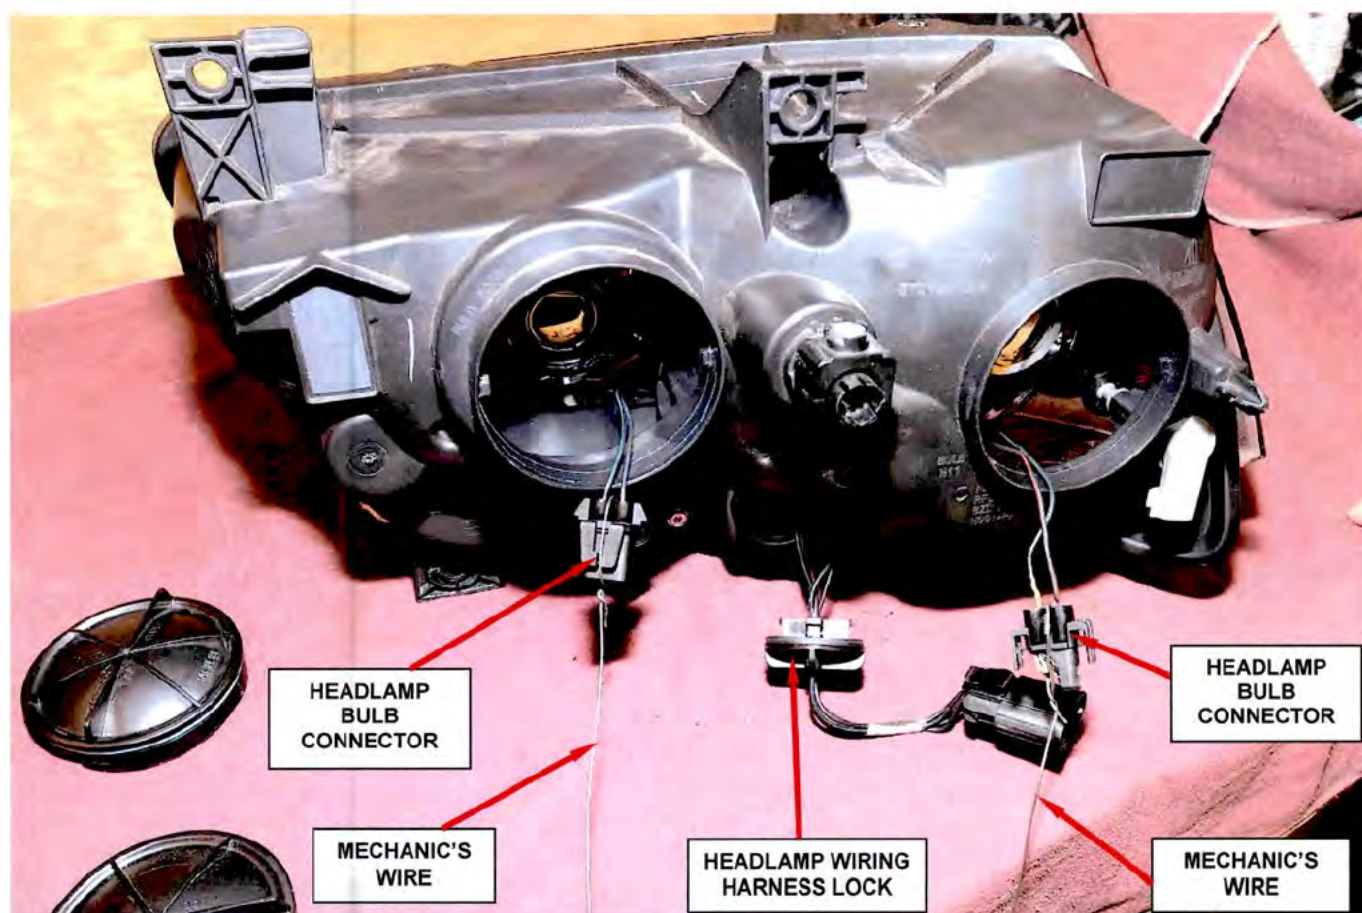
Attach Mechanic's Wire to Headlamp Bulb Connectors
